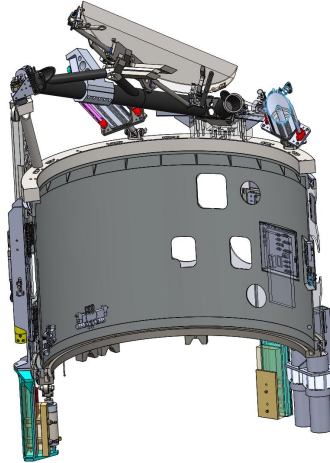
Cross-sectional view of the inner drum. One notes “pockets” for the Galil and RIO mechanisms and fixtures for air supply and electric connectivity.
